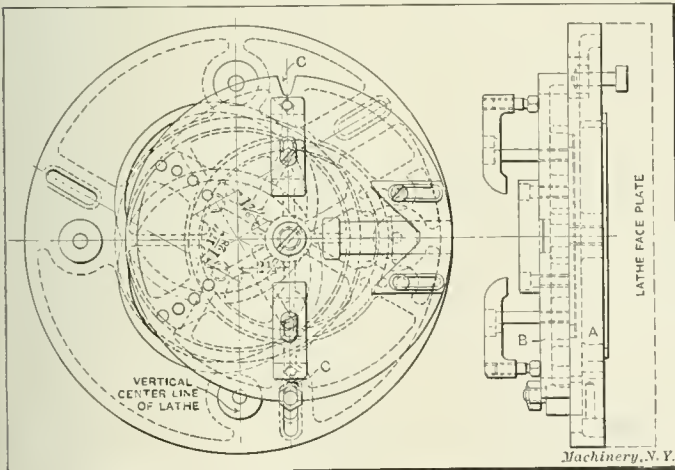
Device for Hollow-milling Gear Cases shown in Fig. 4
